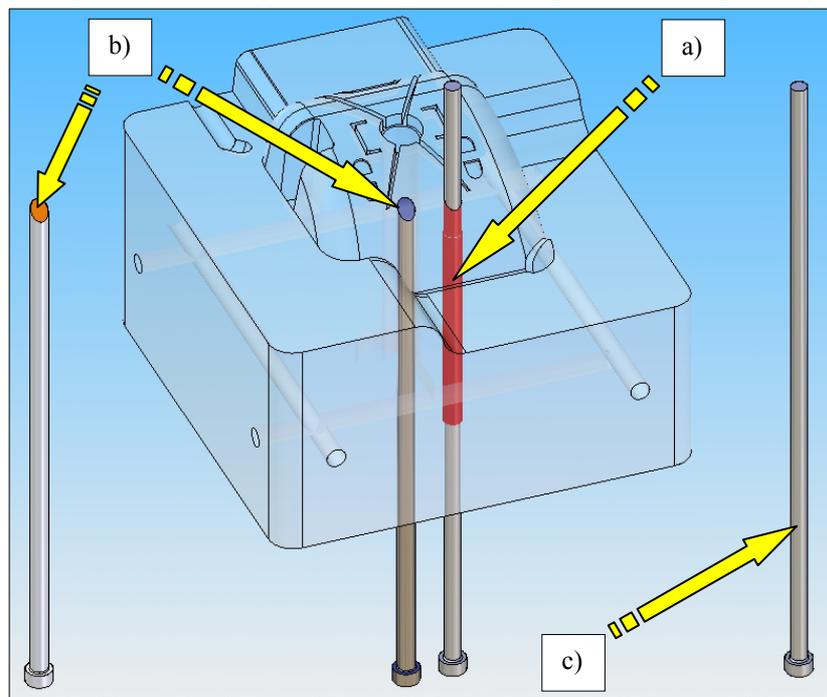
Associative *Boolean* subtract features executed during the placement of the ejector pin, created with the library tool: a) hole feature in the mold insert model, that enables the movement of the ejector pin, b) ejector pin top face replacement with the correct piece of the plastic part, c) the model of the ejector pin, awaiting for the “parent-geometry” selection
